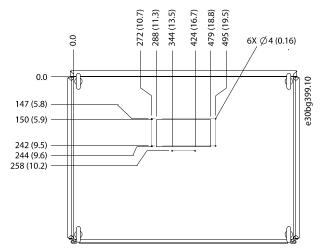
Dimensions of Top Vent Opening in D3h Enclosure
